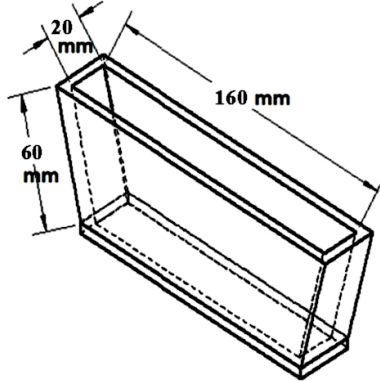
The dimensions of the mild steel mould used for casting of the alloys
